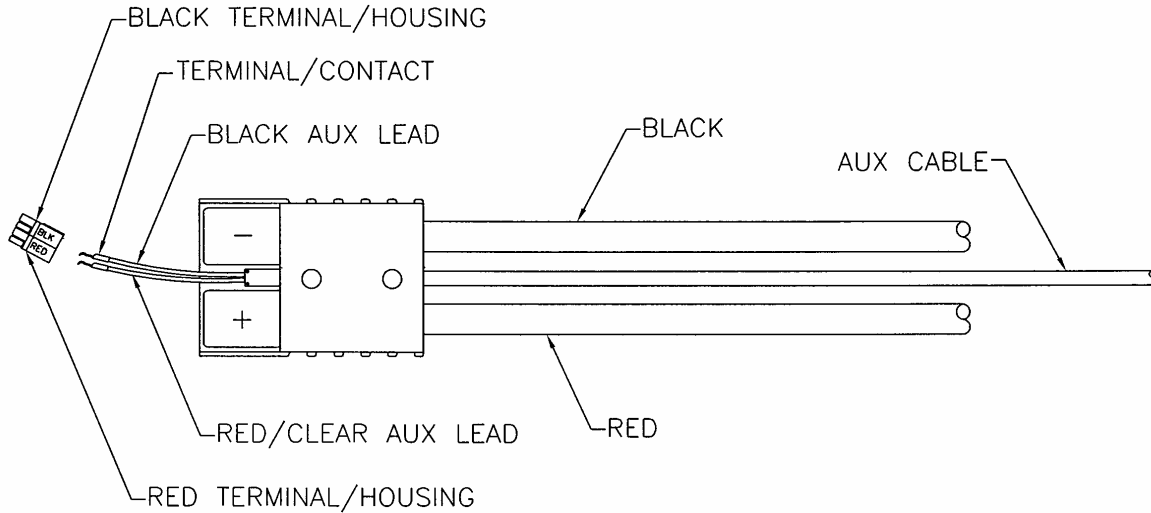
Auxiliary Leads Drawn through SBX Connector for Insertion in Terminal/Housings
